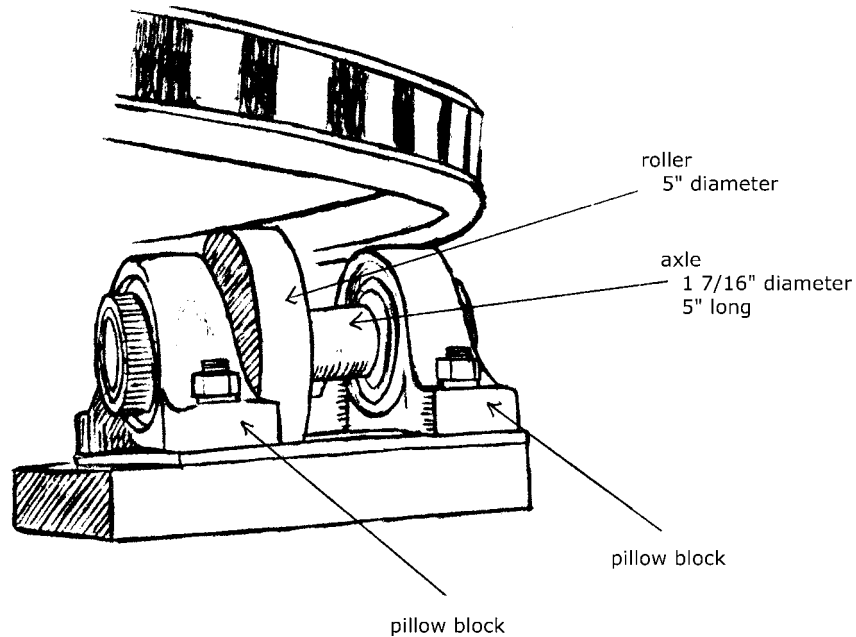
Master sprocket stabilizing rollers keep master sprocket level as it rotates. Outside edge of roller must be hardened to prevent mushrooming of metal.
